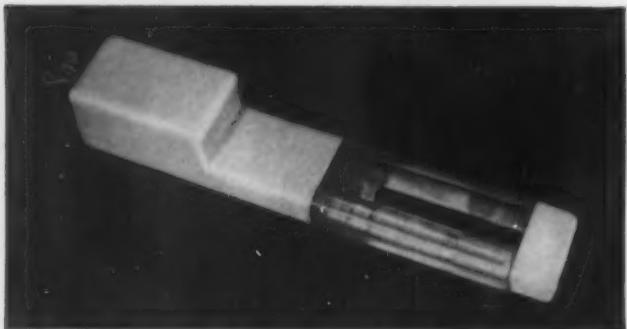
Stroboscope tube component has an epoxy-acrylic butt joint. This joint could not have been made by heat-sealing or welding processes, or with metal fasteners, but was simple to make by adhesive bonding. The adhesive used was a 100% solids epoxy-based formulation that cures at room temperature. This bond had to withstand very severe tests: for example, it had to survive the shock of sudden changes in temperature (from -58 to 212° F.) while under load. (Photo, Aircraft Marine Products)
